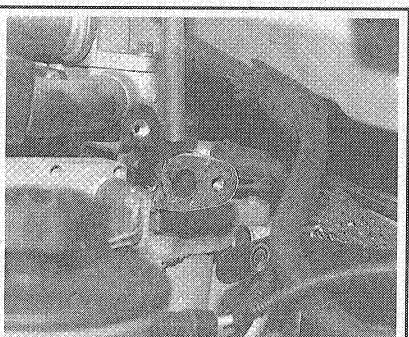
thoroughly clean the EGR valve mounting surface
